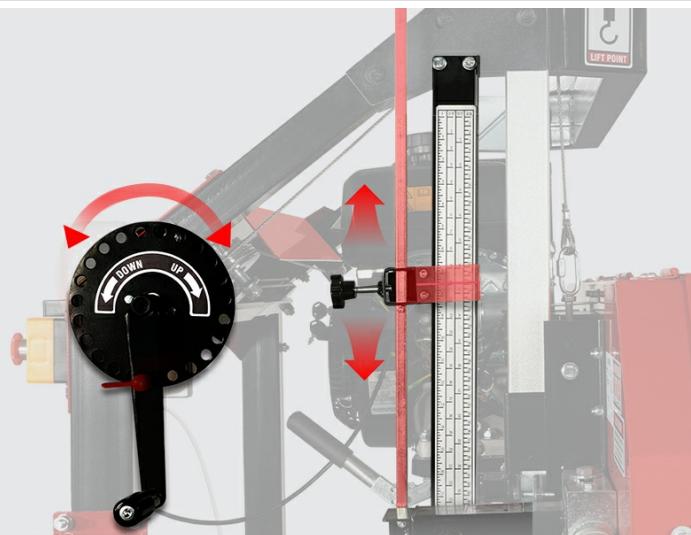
Precision ruler and handle for adjusting cutting thickness up to 7 inches.
